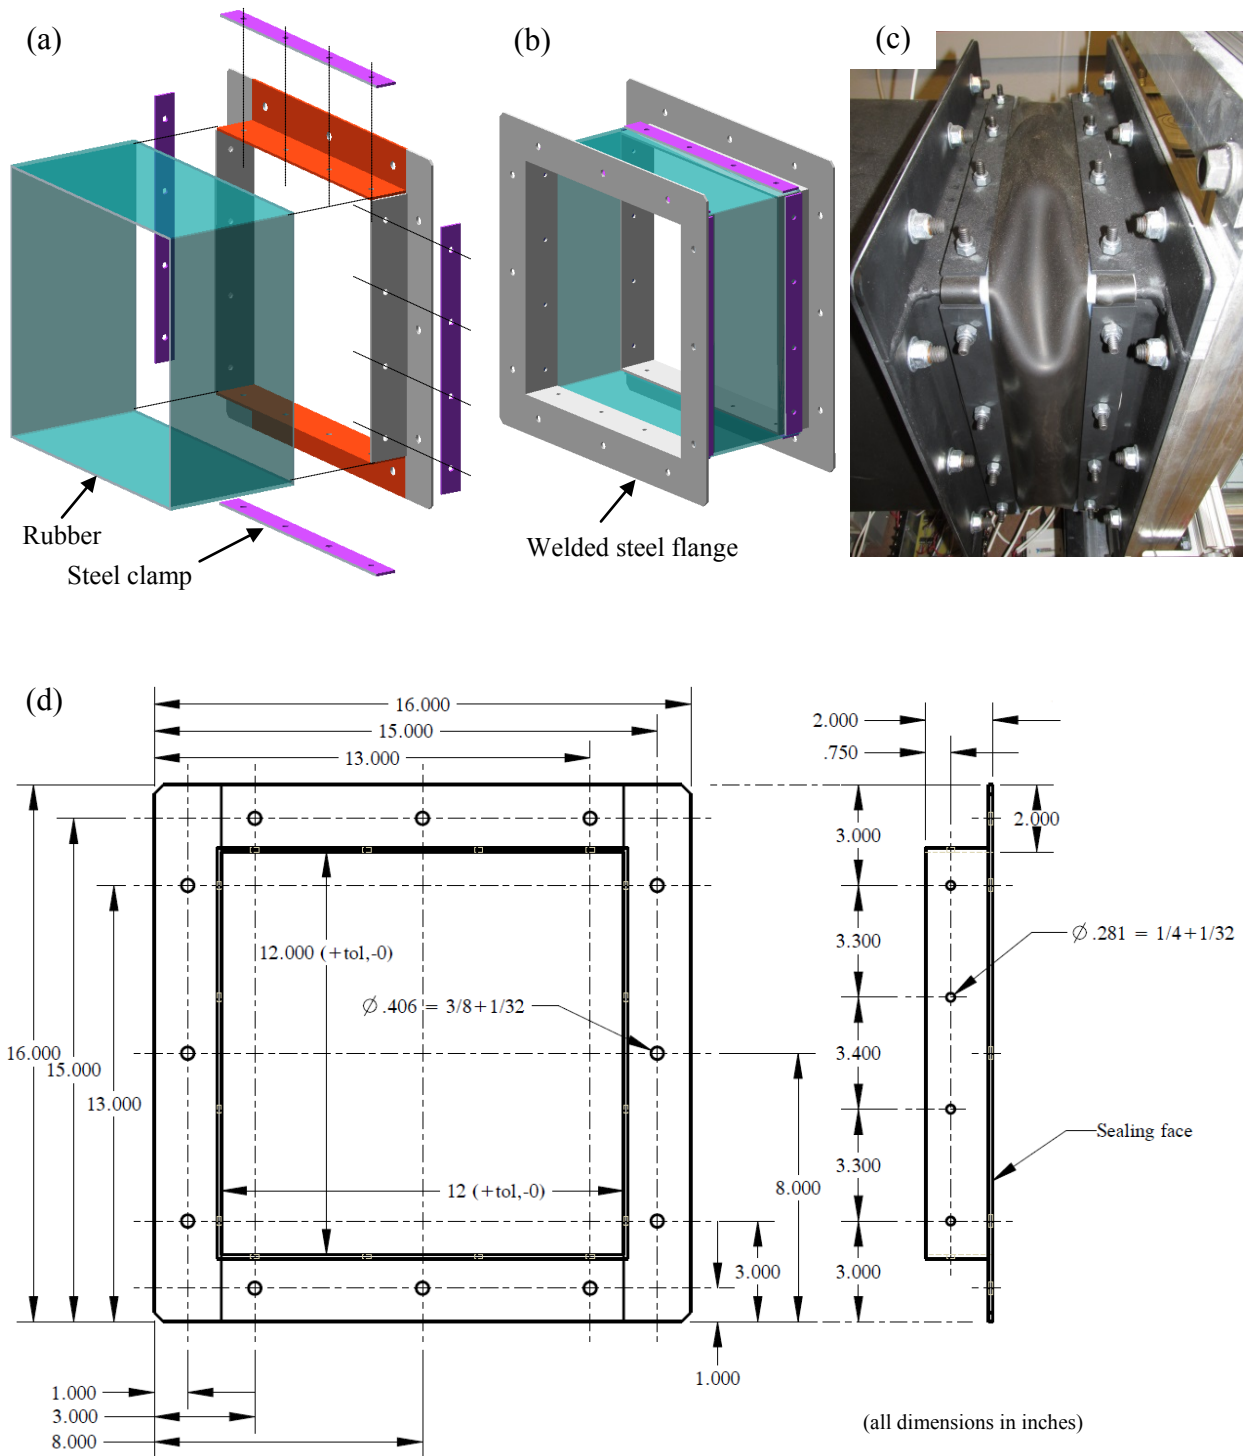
Design details of the vibration isolator showing (a) an exploded view and (b) a fully assembled view of CAD renderings along with (c) a snapshot of the full assembly installed on the wind tunnel, and (d) a drawing showing the dimensions of the flange and bolt pattern.
